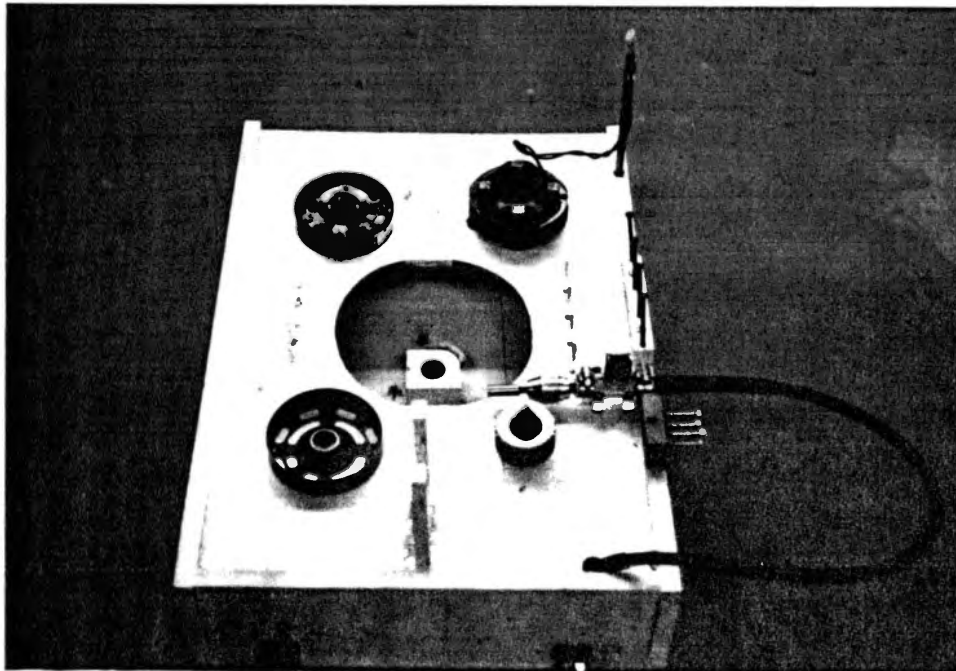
Assembly Fixture Prior to Start Dual-Arm Assembly Sequence
